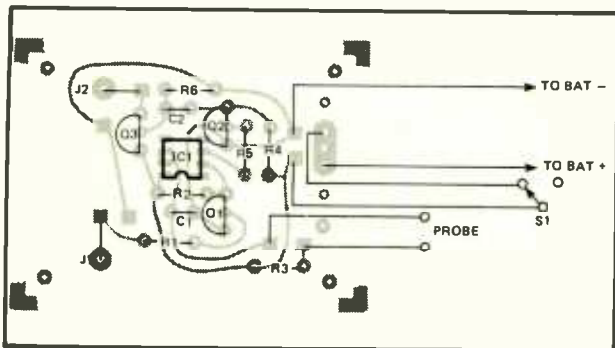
THE COMPONENT SIDE of the printed circuit board is also the panel for the BioBox. Parts placement and locations are shown here.
